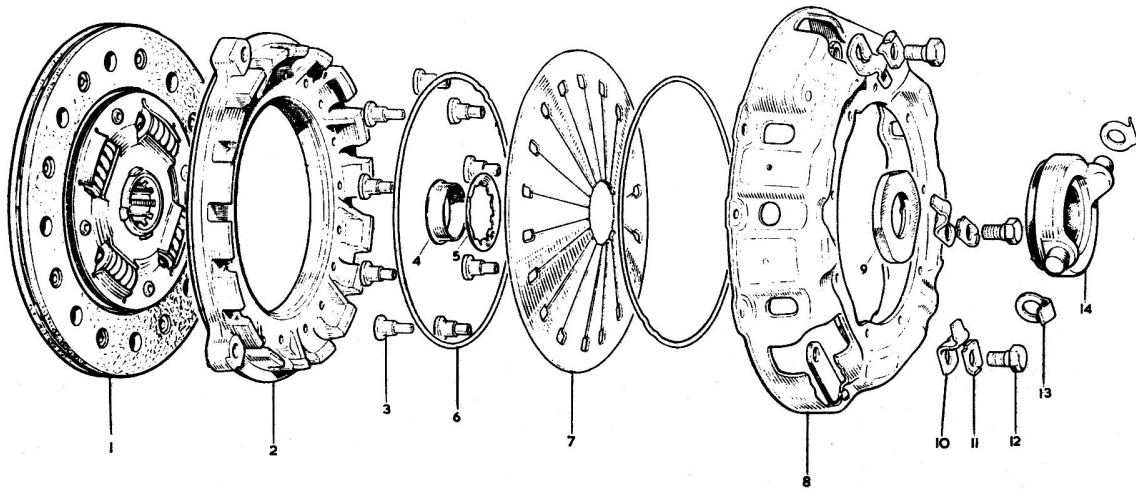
EXPLODED VIEW OF THE DIAPHRAGM SPRING CLUTCH
